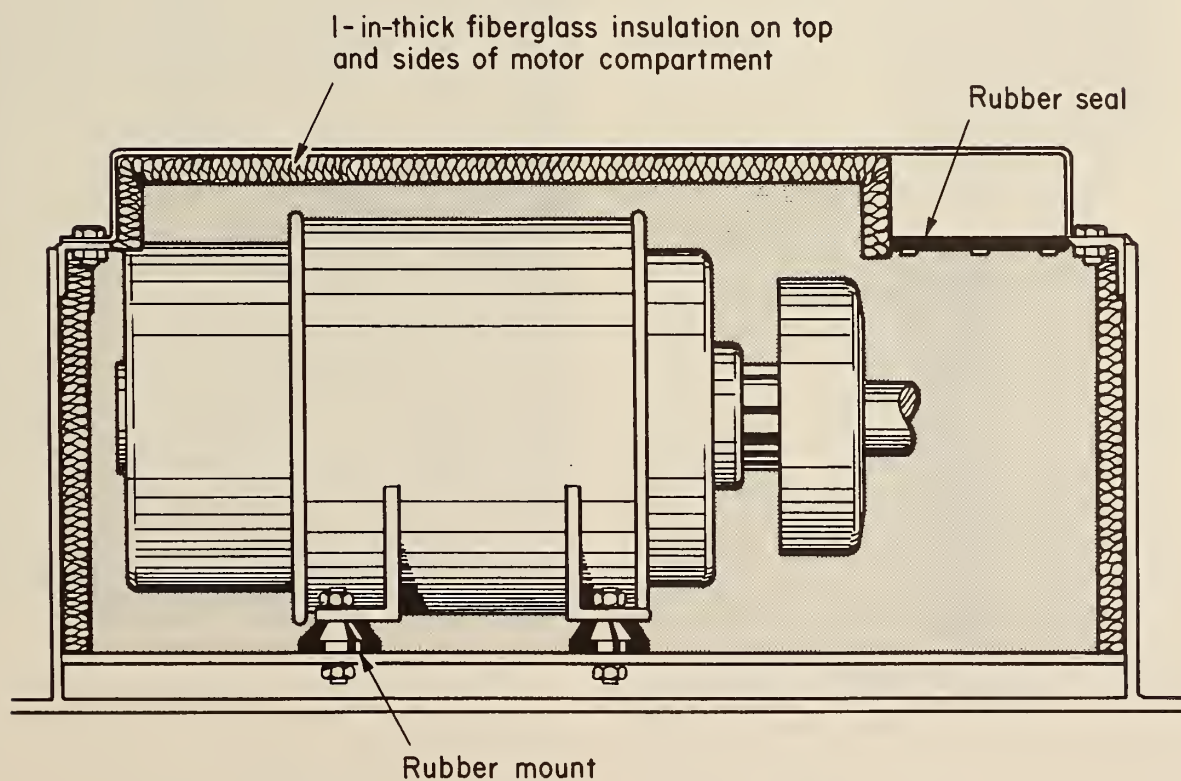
Motor enclosure of factory-quieted mantrip.
